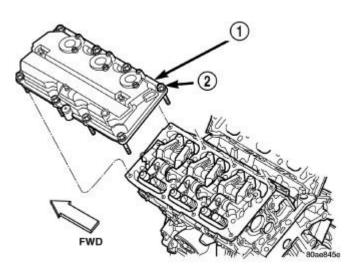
Cylinder Head Cover & Bolts Courtesy of CHRYSLER LLC
